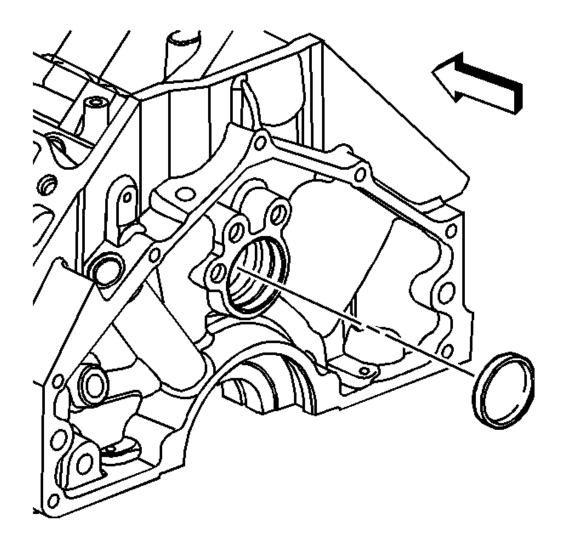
View Of Camshaft Rear Bearing Hole Plug Courtesy of GENERAL MOTORS CORP.
